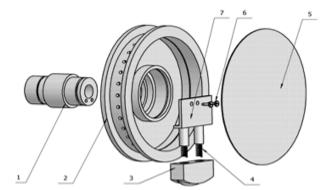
Structure diagram of the seed-metering device; 1: Hollow mandrel; 2: Seed-metering device shell; 3: Air cut valve; 4: Adjusting spring; 5: Sealing cover; 6: screw; 7: Air cut valve support
